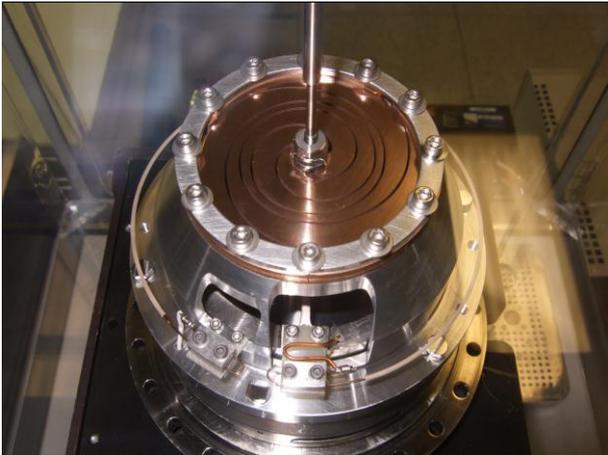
Compressor assembly showing the outer diaphragm spring and lead in wire.
